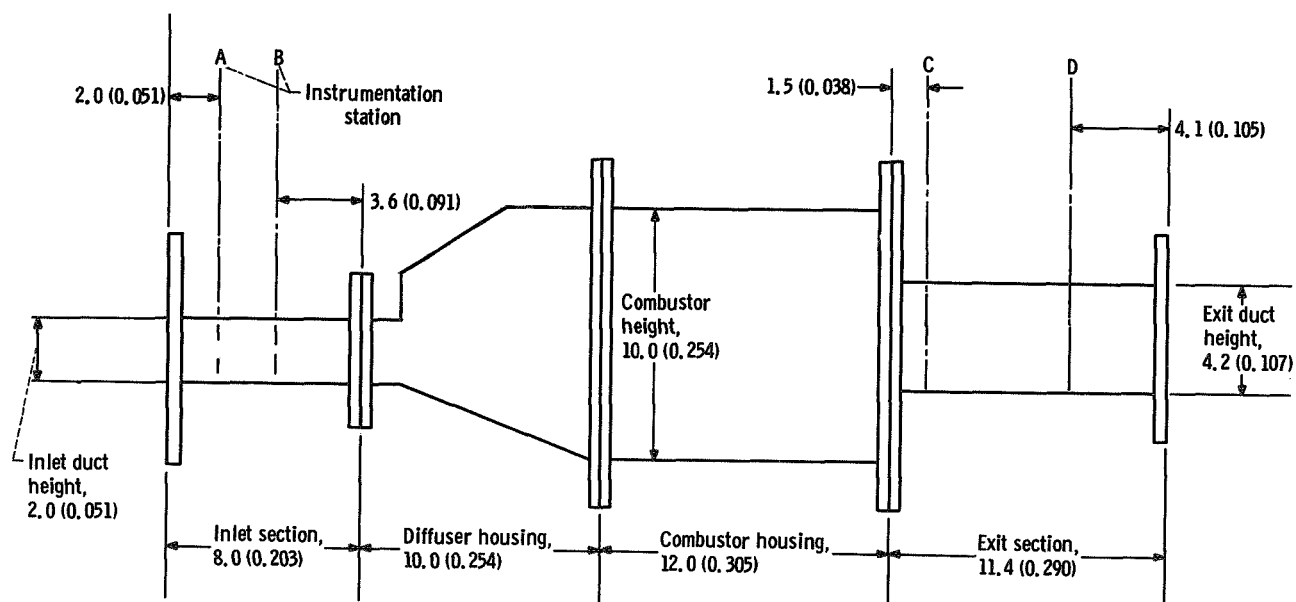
Test sections and instrumentation stations. Dimensions are in inches (m).
